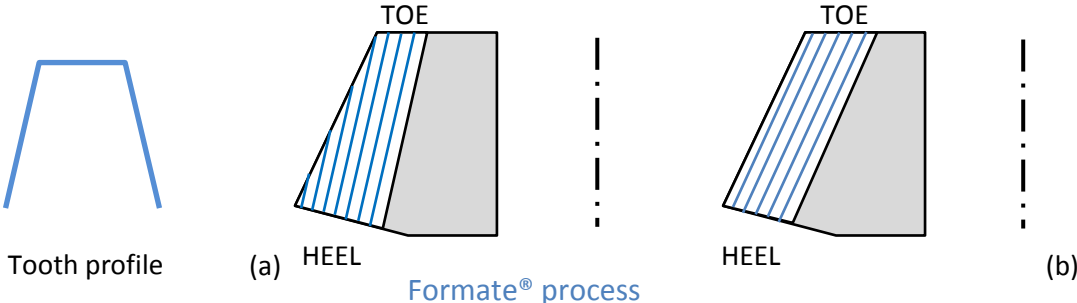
Formate® tooth profile and cutting grooves for (a) face-milled and (b) face-hobbed process
